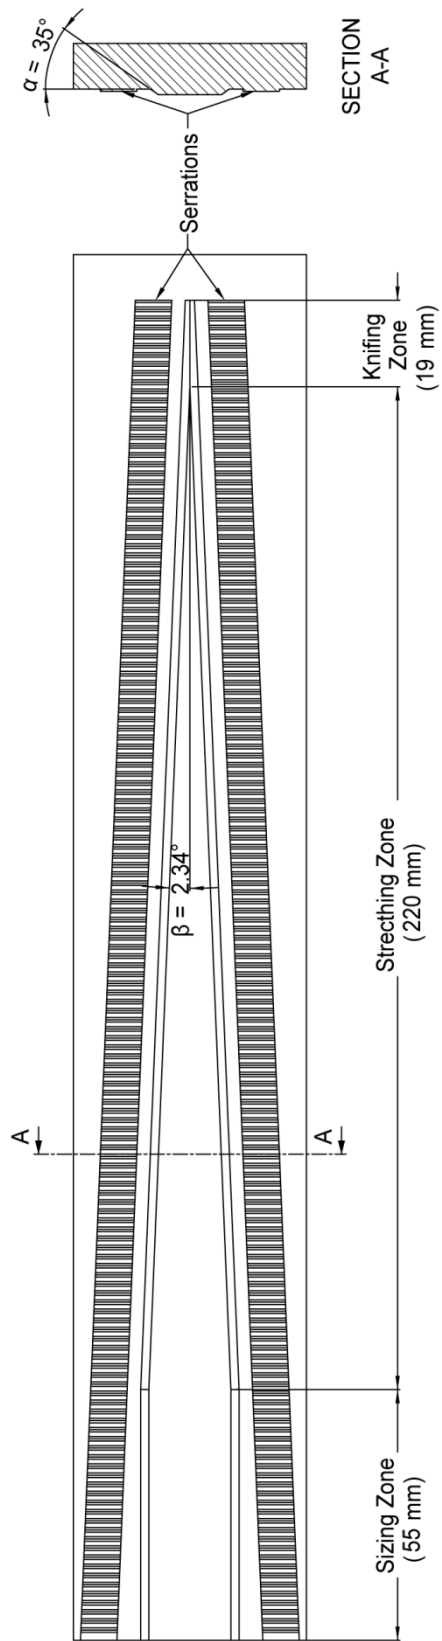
Technical drawing of the Tool-1, used for experimental verification.
